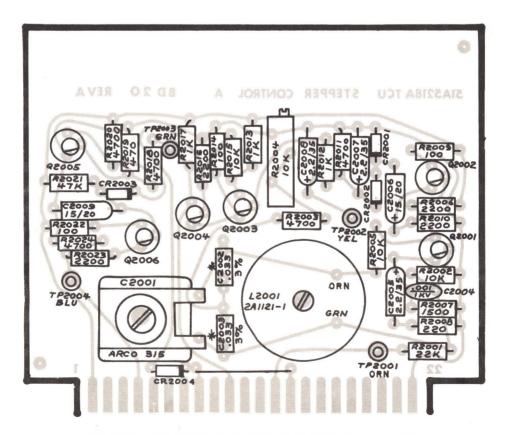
TCU Stepper Control A (Board 20), Parts Location
